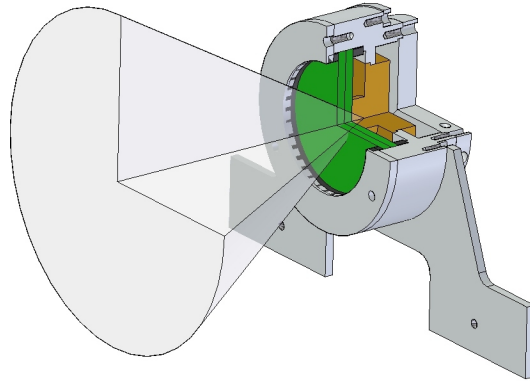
The camera unit, with the QuickCam board (orange) mounted behind welding glass (green). A USB cable (not drawn in this picture) exits through the back of the unit.
